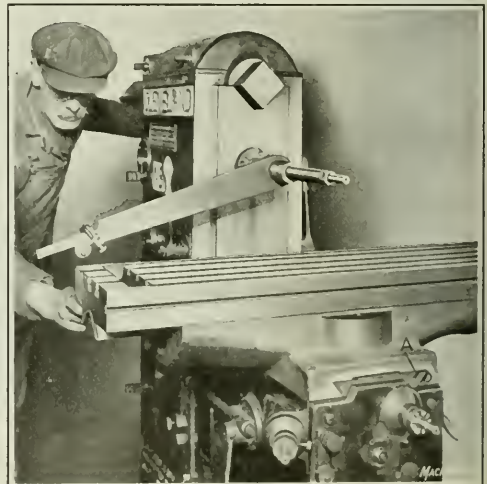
Arm and Indicator used in squaring up the Table with the Spindle
